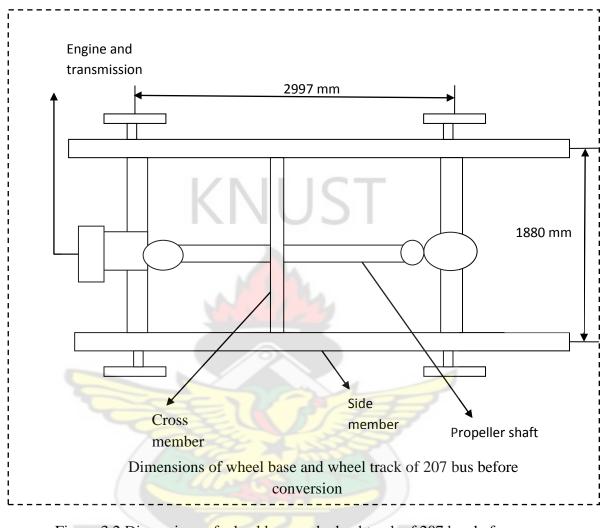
Dimensions of wheel base and wheel track of 207 bus before conversion
